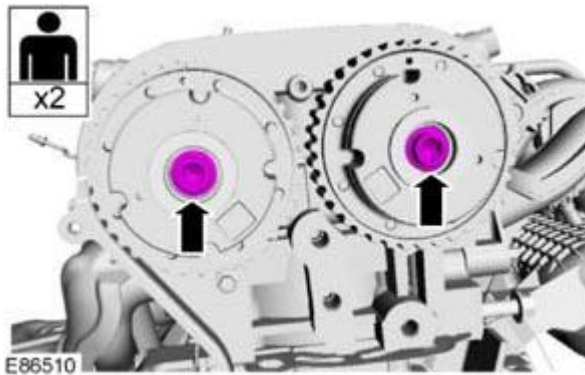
Locating Camshaft Phaser And Sprocket Bolts
